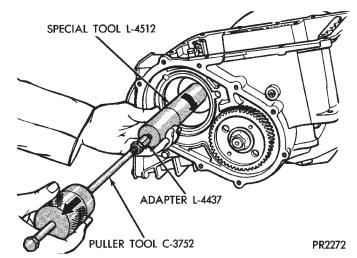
Remove Transfer Shaft and Bearing Retainer Assembly
